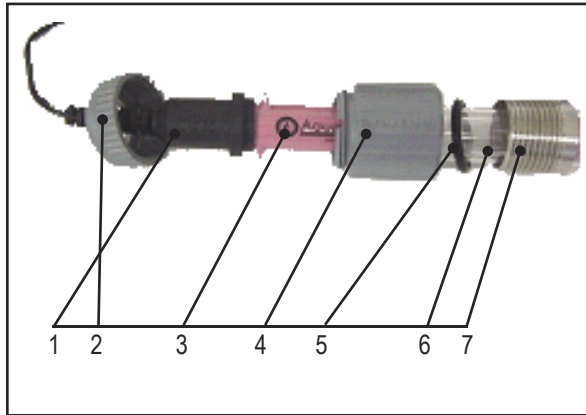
FIG. B SE LAMP SOCKET ASSEMBLY IDENTIFIED ELEMENTS
